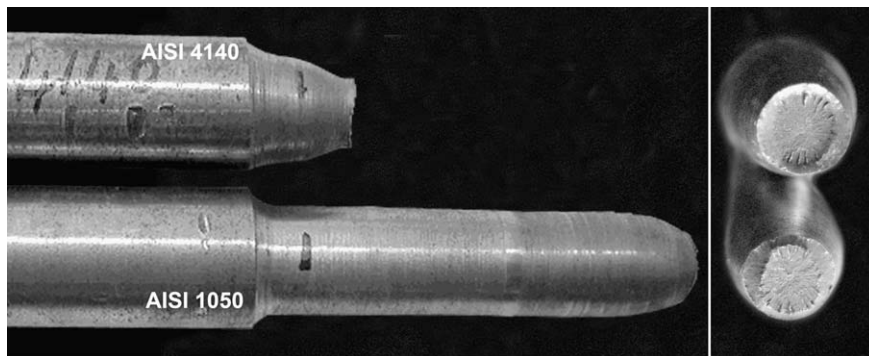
The macro photographs of the tensile tested and the ductile fracture surface of tensile tested specimen.
